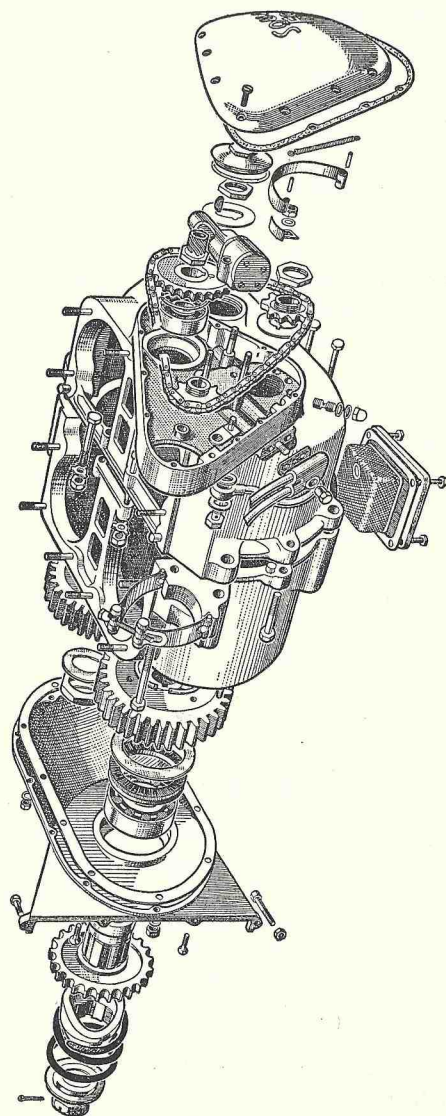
EXPLODED VIEW OF 1000-C.C. Mk. II BOTTOM HALF.
